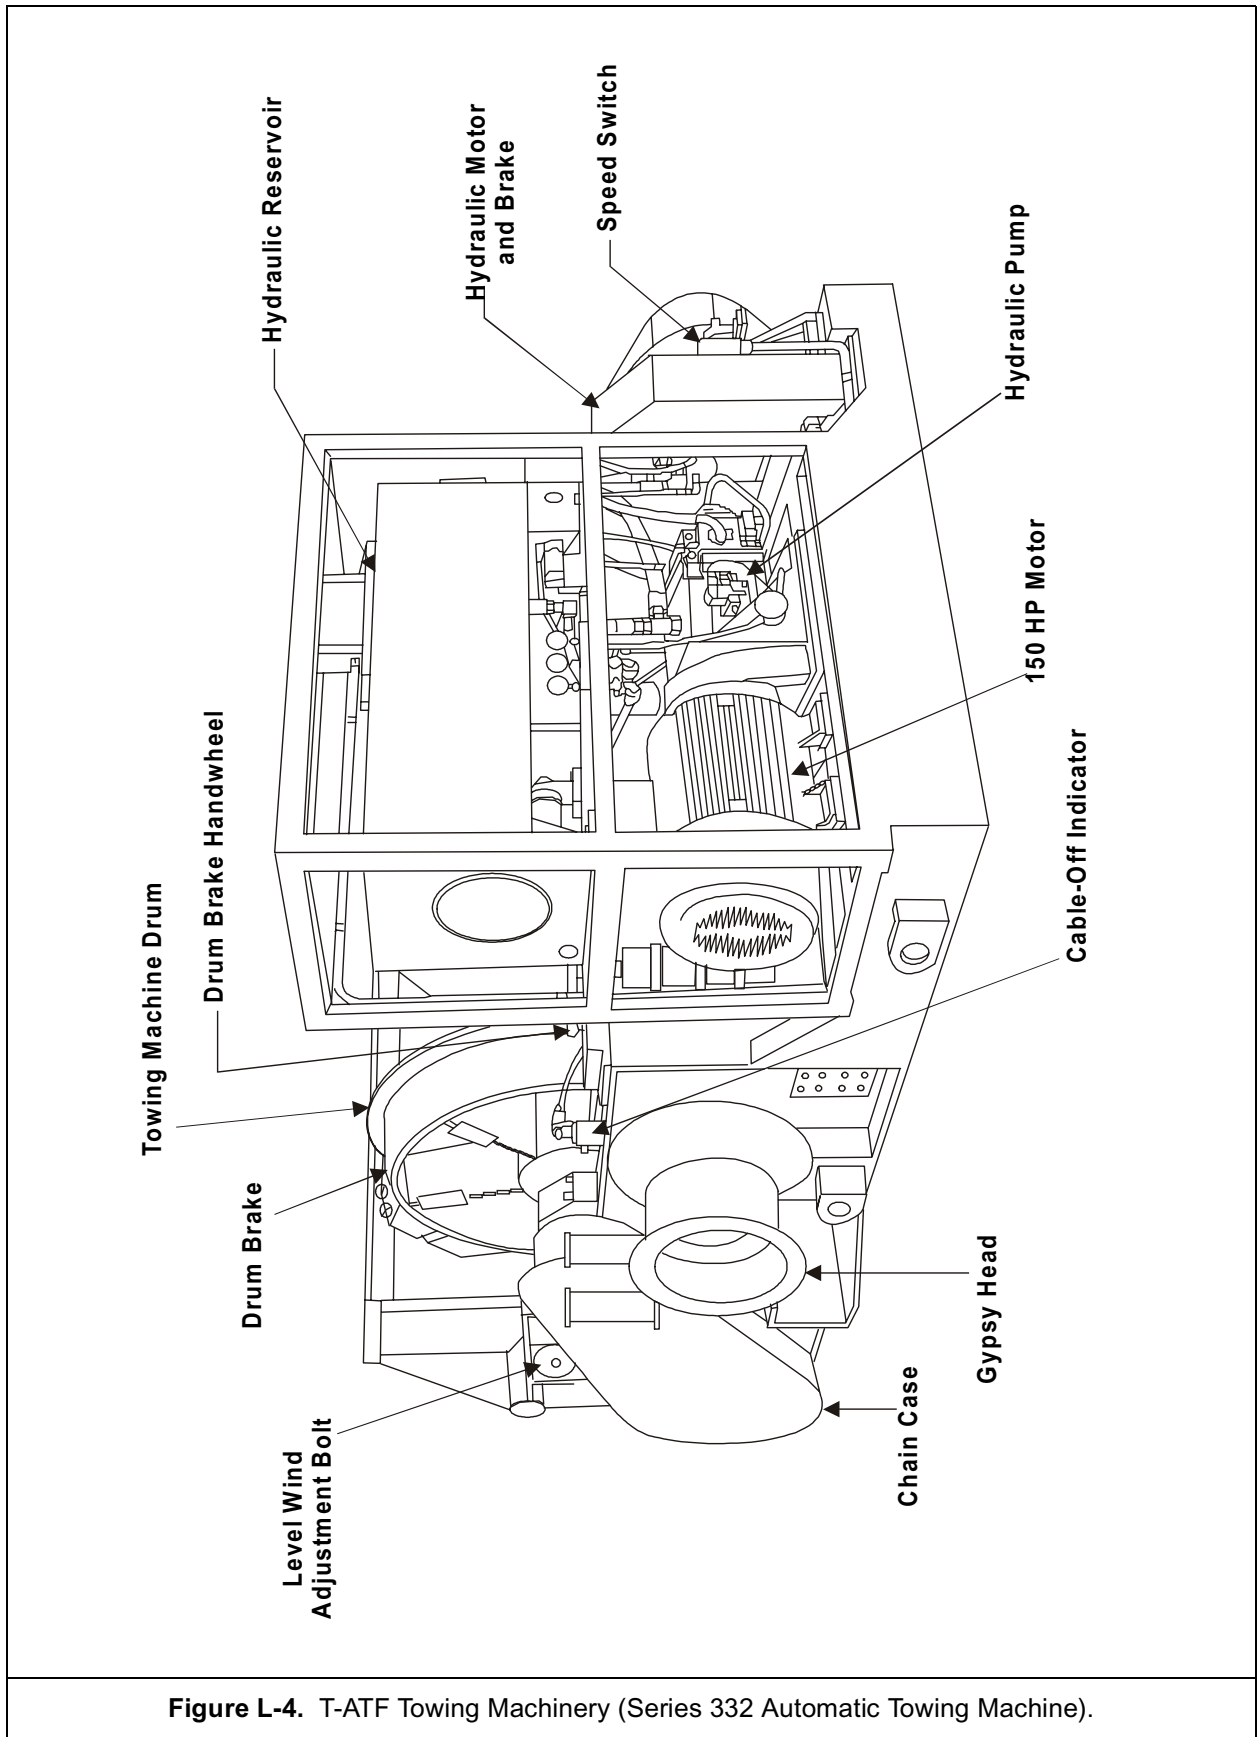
T-ATF Towing Machinery (Series 332 Automatic Towing Machine).
